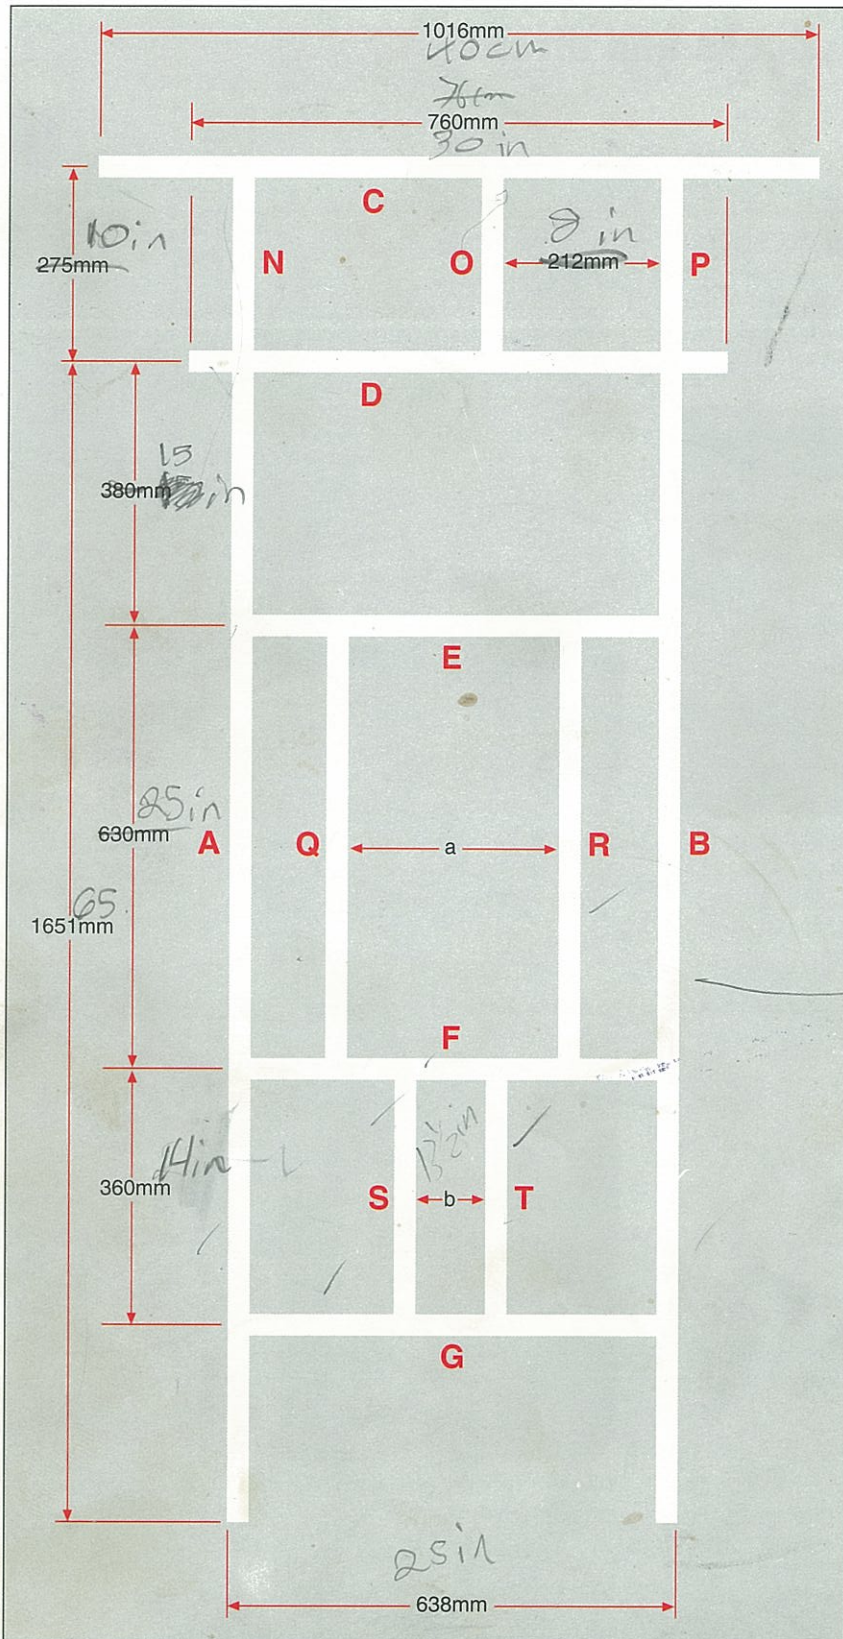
Dimensions for marking out the frame building board showing the positions of the main frame tubes.
